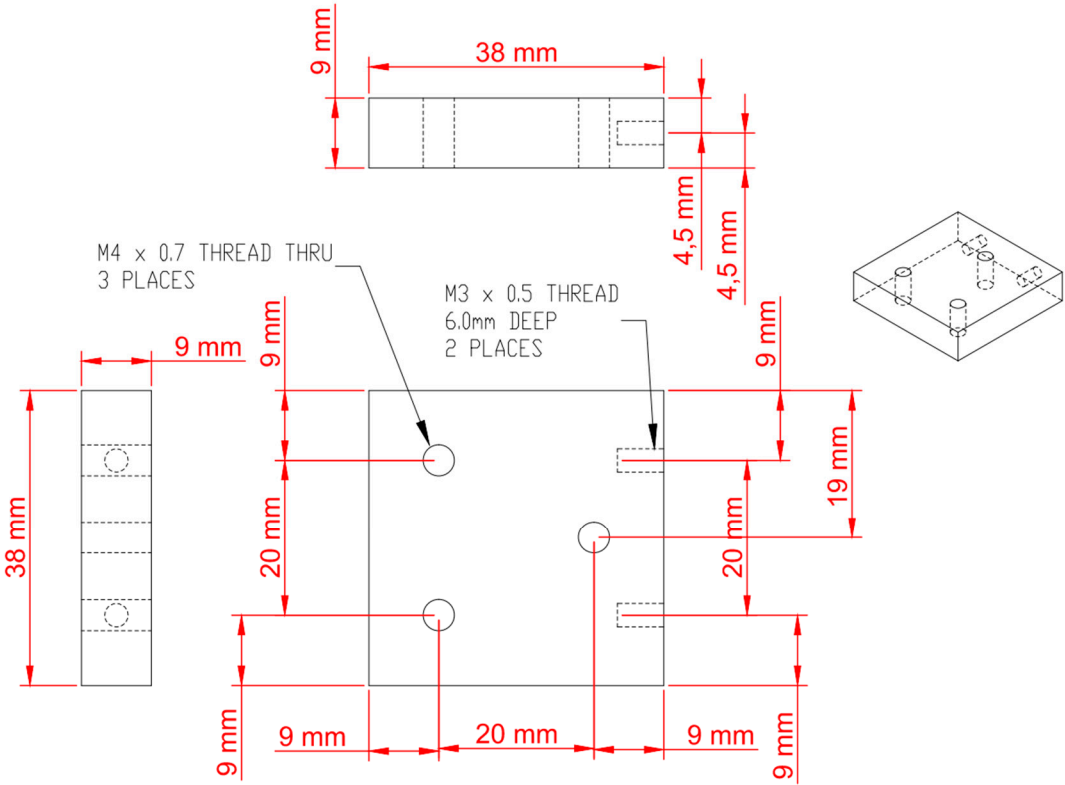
Detailed mechanical drawing of Part 2 from Figure S1.
